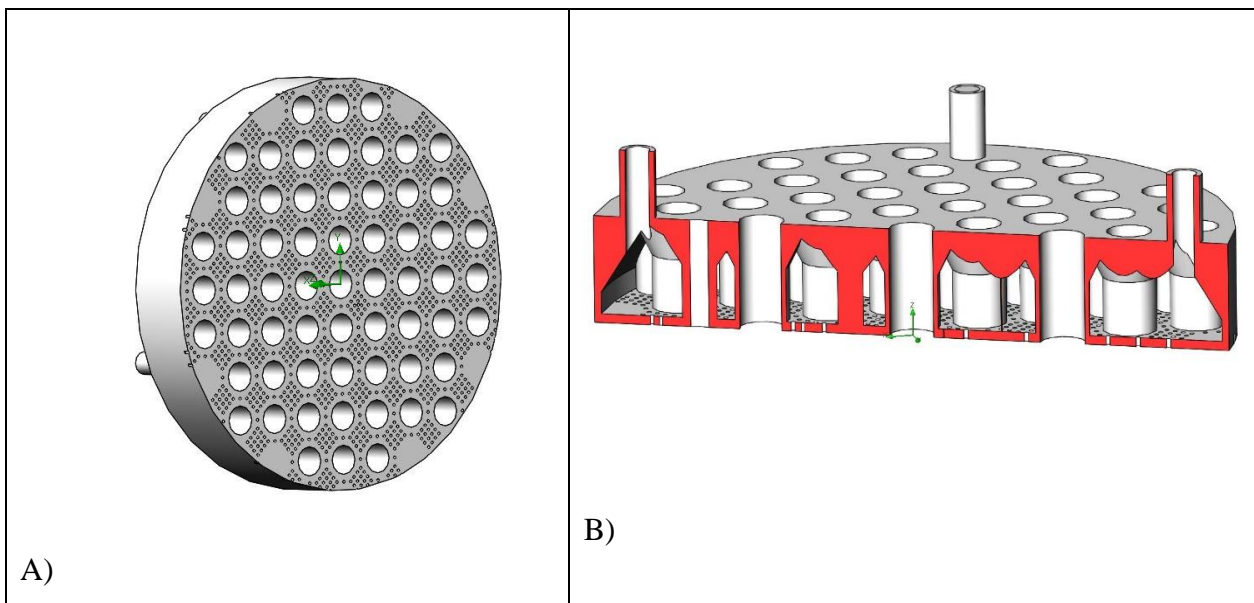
A) Air filter with small holes for air, and large holes for water. B) Cross section of air filter with special roofing structure to avoid support structure when 3d printed.
